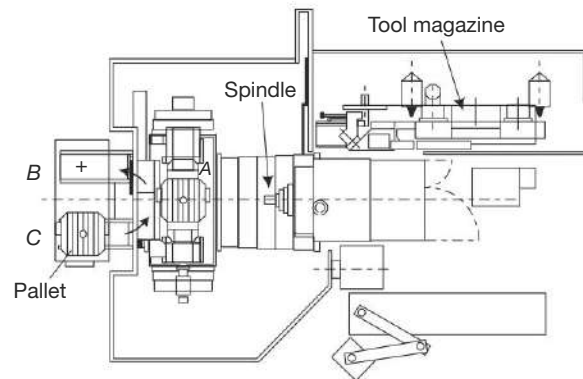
A typical horizontal machining centre with an automatic pallet changer
